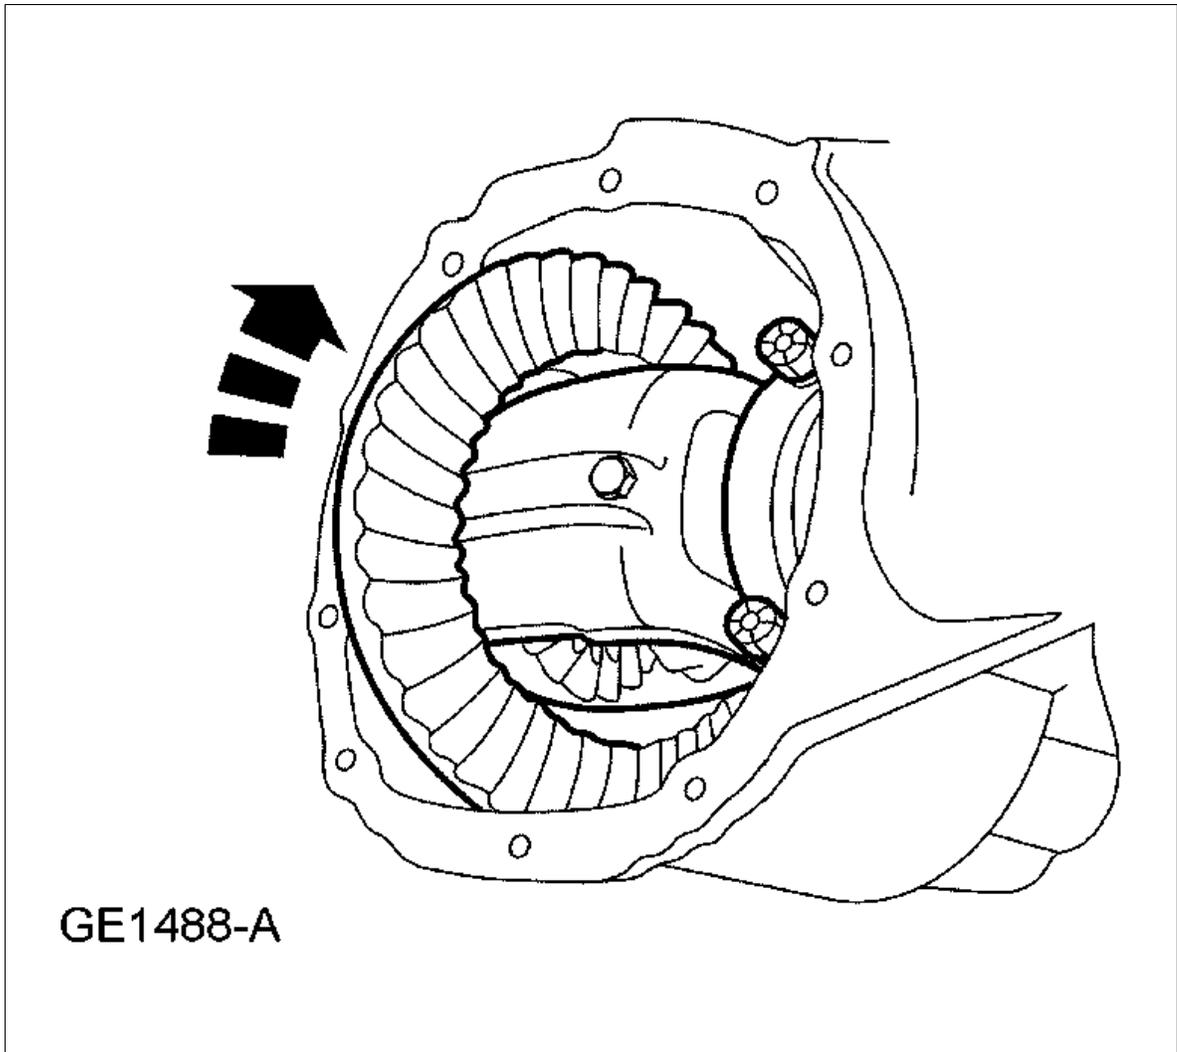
Identifying Differential Bearing Caps And Differential Bearing Cap Bolts
